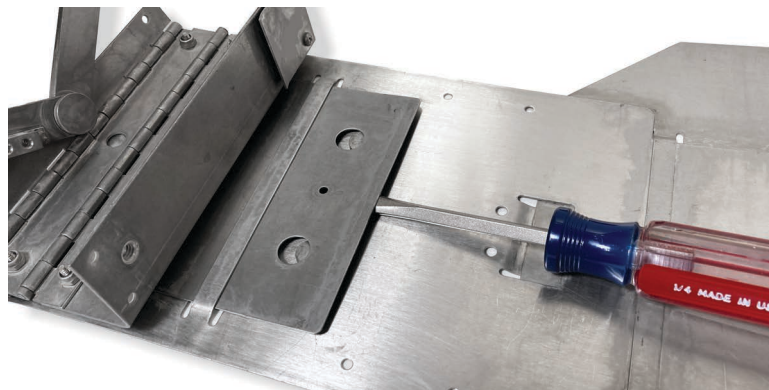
Bend the base and/or extension to fully engage the buttons.
